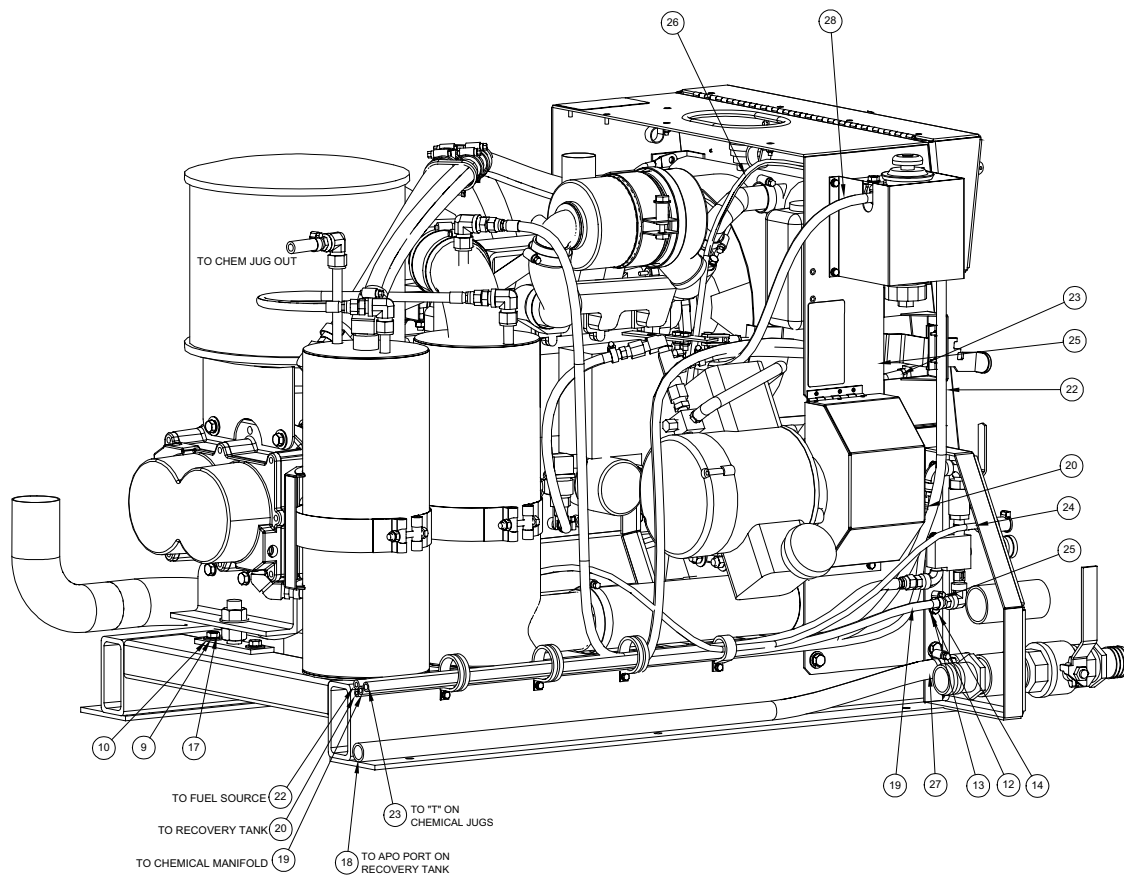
Machine Assembly CTS 450 Diesel - Rear View
